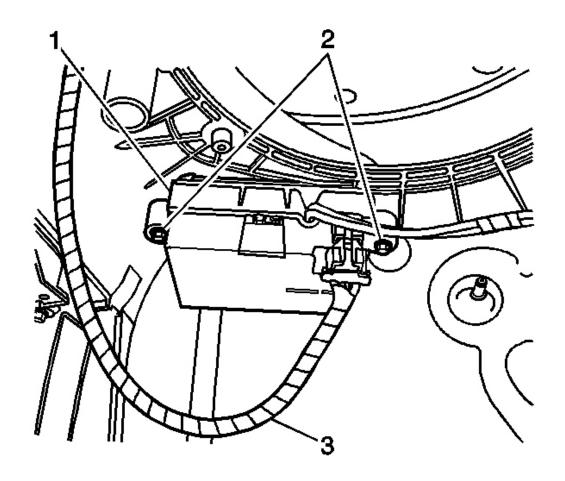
View Of Electrical Connector, Blower Motor Control Processor & Mounting Screws Courtesy of GENERAL MOTORS CORP.
